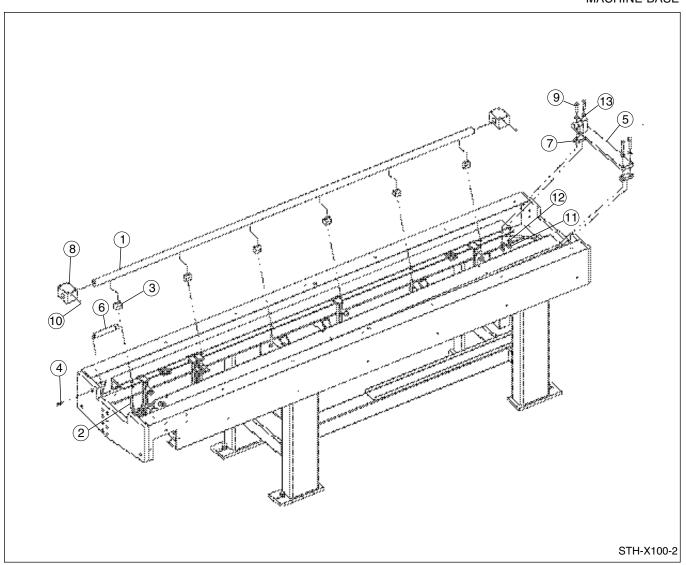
FIGURE A - TUBE HONE MACHINE BASE ASSEMBLY (2 of 8)
